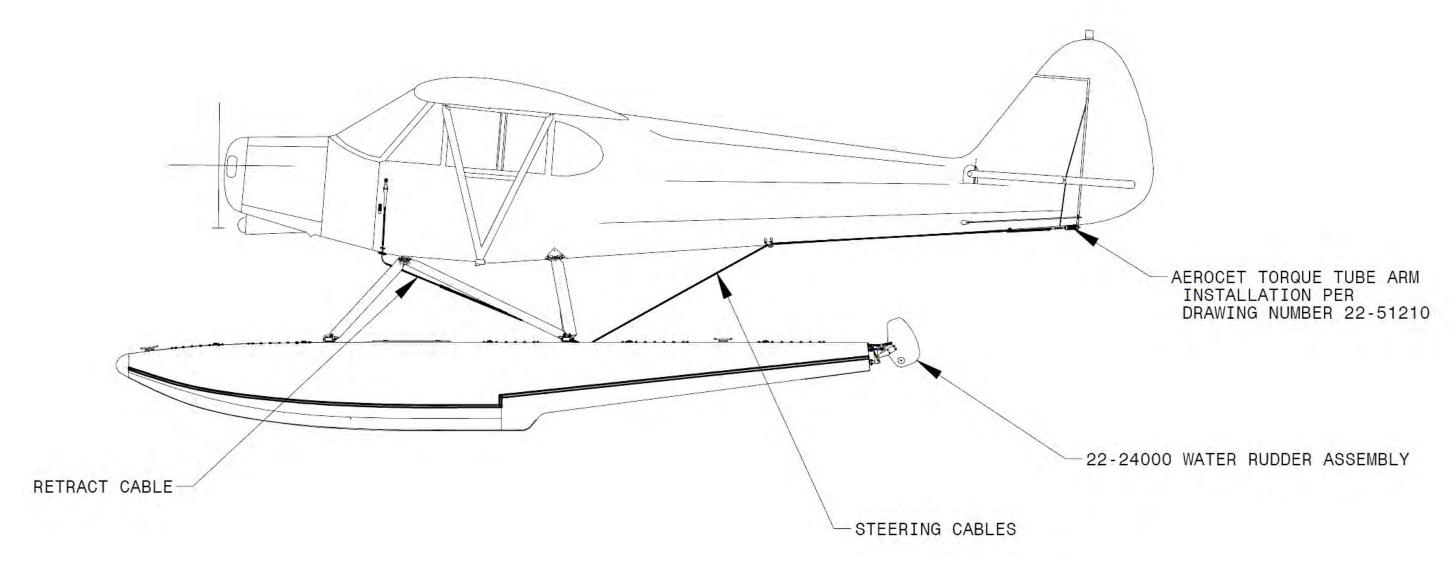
Water Rudder Rigging and Pulley Installation (Page 1 of 5)
